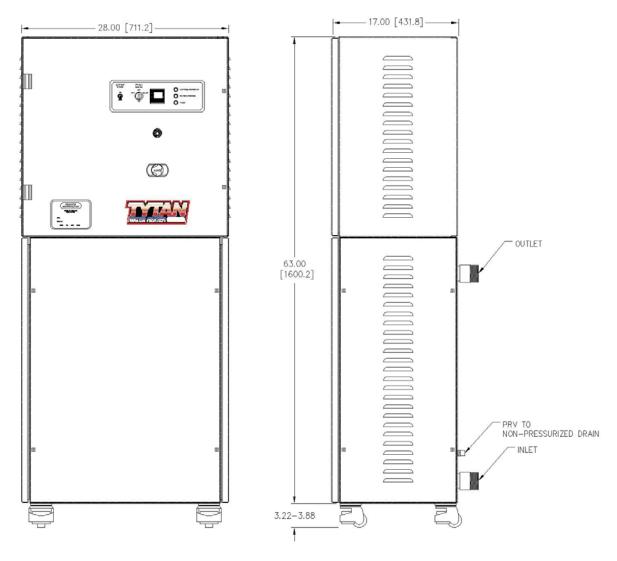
Dimensional Drawing, 96kW – 144kW Units
